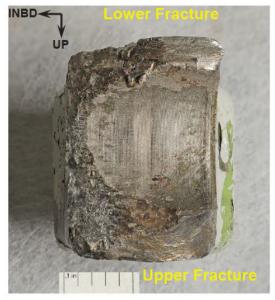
Close-up of mating fracture surfaces of Lower Torque Arm
